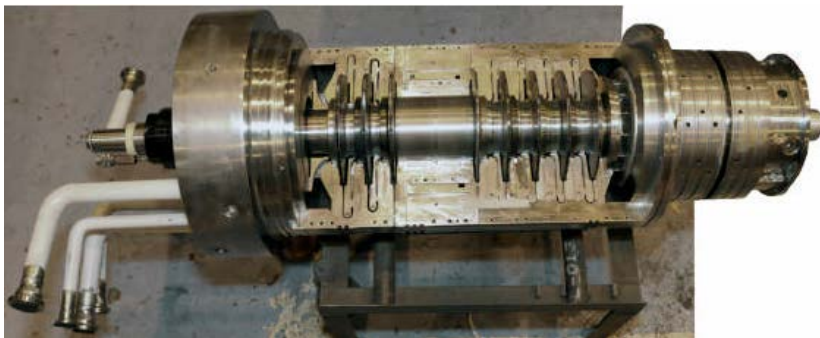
The assembly of the 5.2 MW CCS compressor. Photo courtesy of Dresser-Rand
